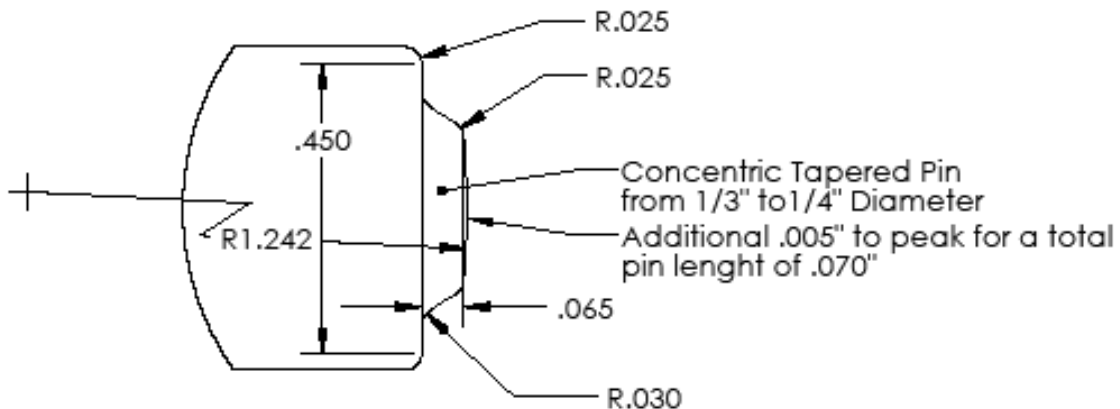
Detailed drawing of the friction stir welding tool pin used for plunge testing in thermohydrogen processed titanium.
